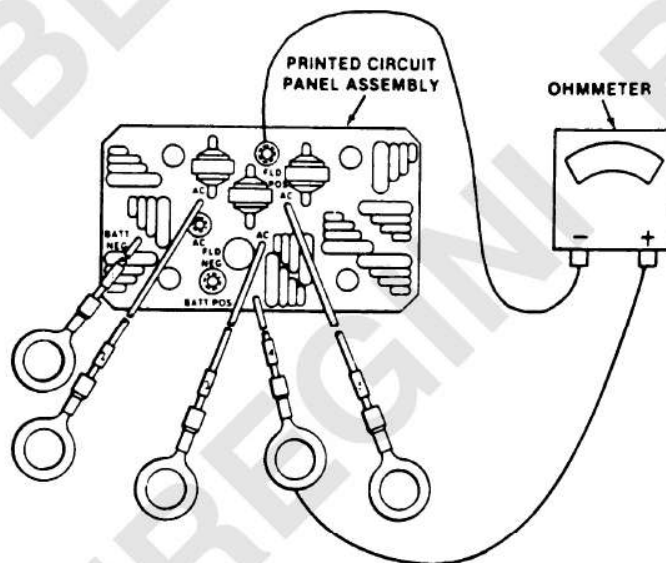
Shorted Printed Circuit Panel Assembly Capacitor Check.
